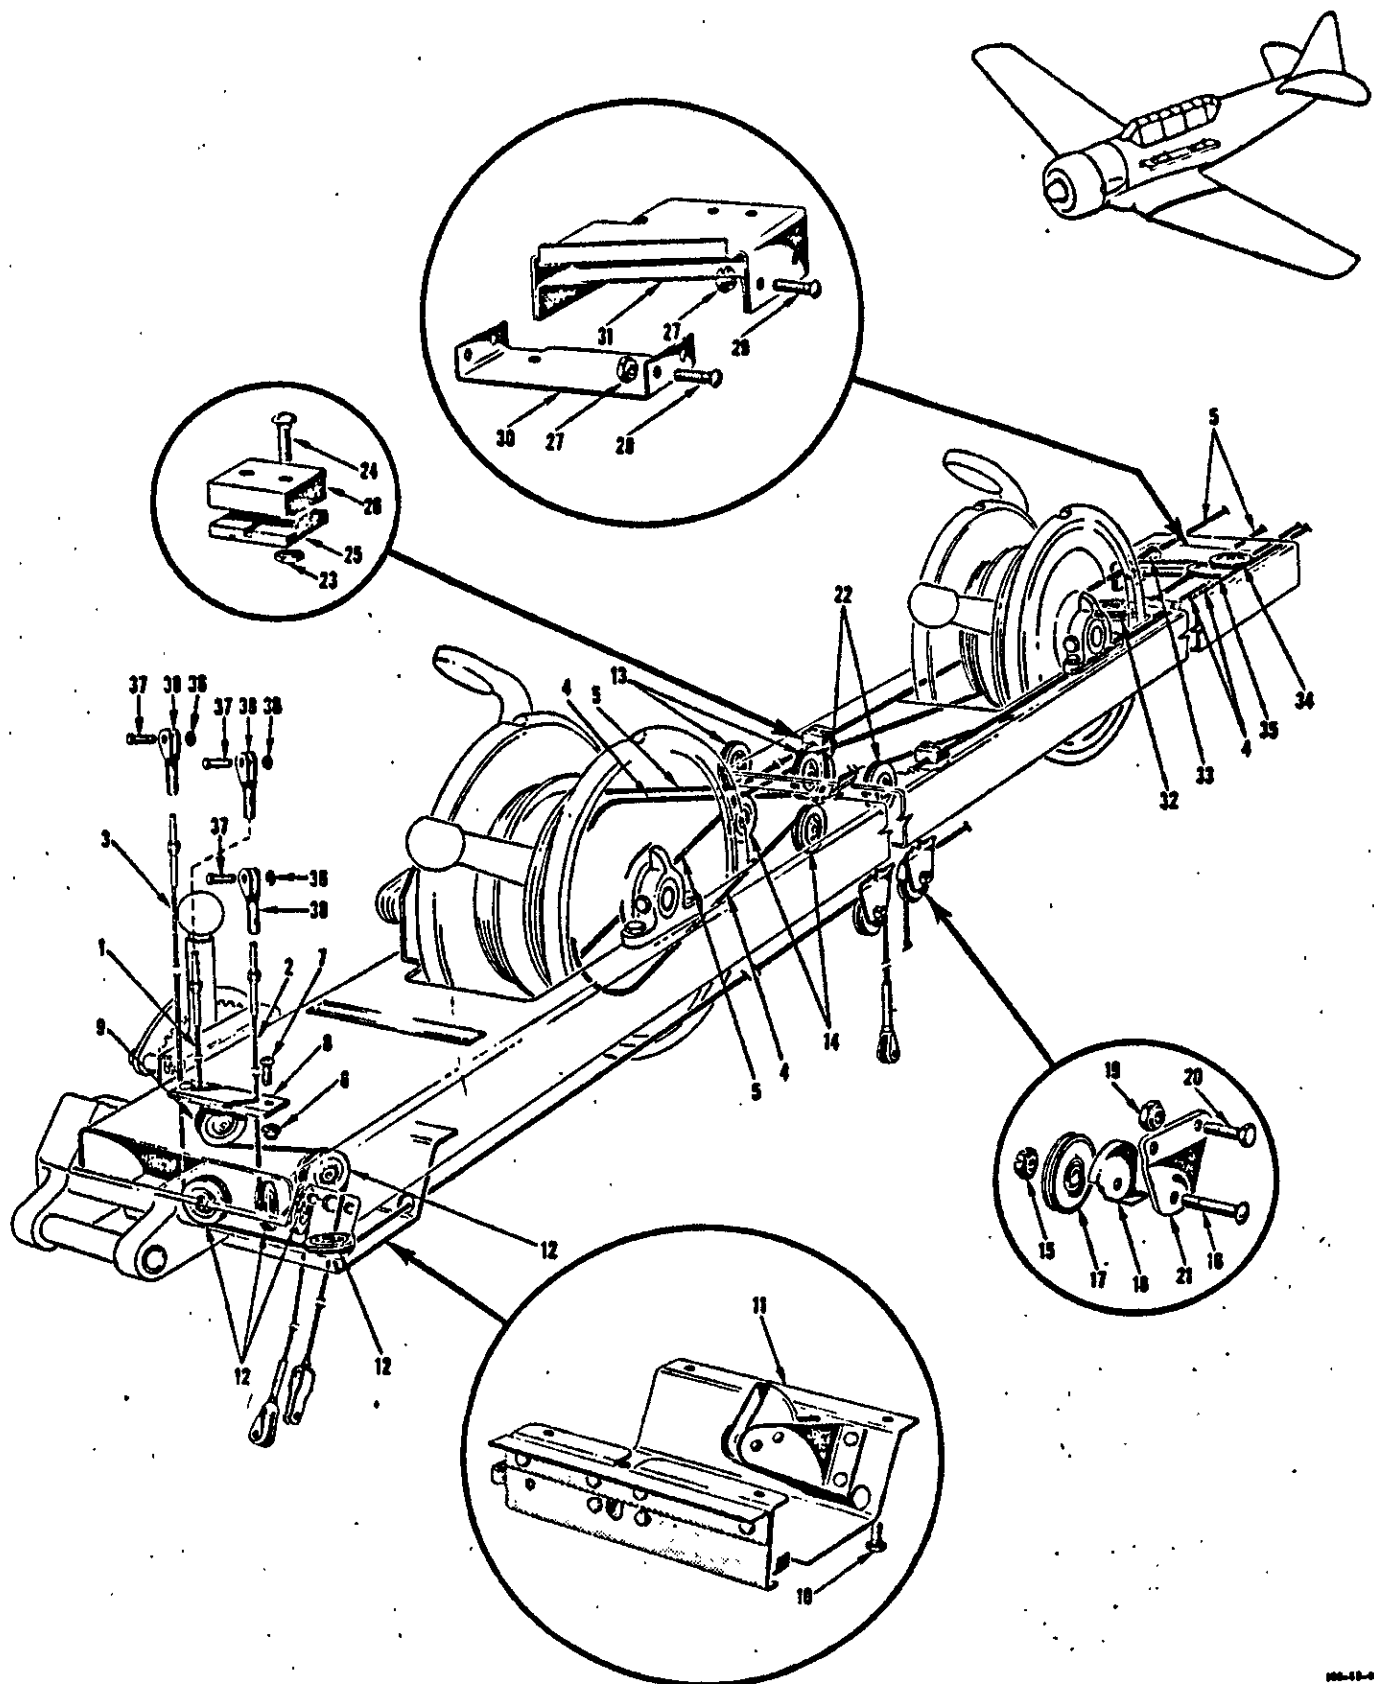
CONTROL SHELF TRIM TAB CABLES AND PULLEYS
